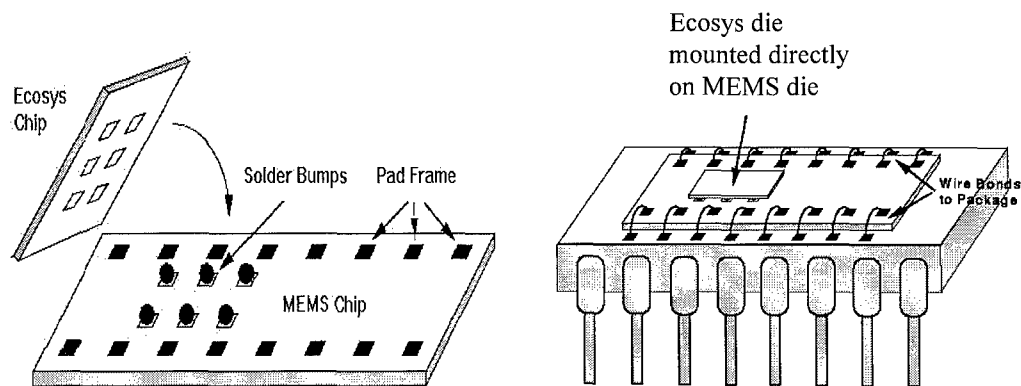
SmartMUMPs packaging. The VLSI electronics chip (Ecosys chip) is soldered directly onto the MEMS chip, which is then wire bonded to a standard package [6].
